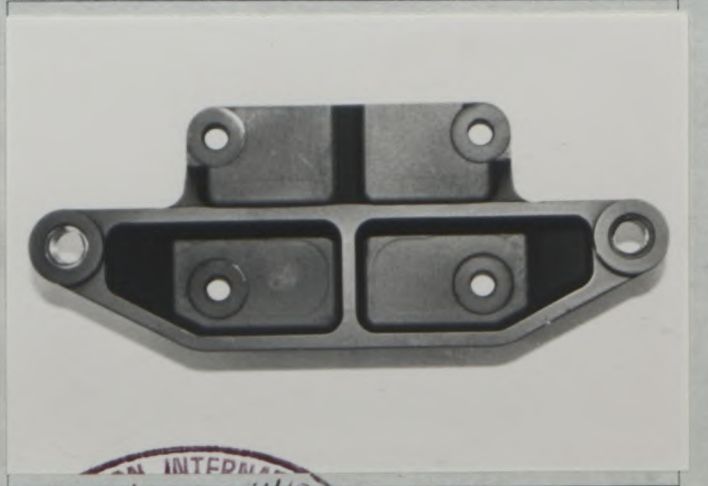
FRONT AND/OR REAR BRAKE CALIPER MOUNTING BRACKET TYPE B
